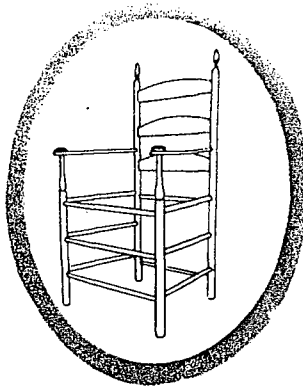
Simple axonometric drawing. (Shaker Shop Drawings)
